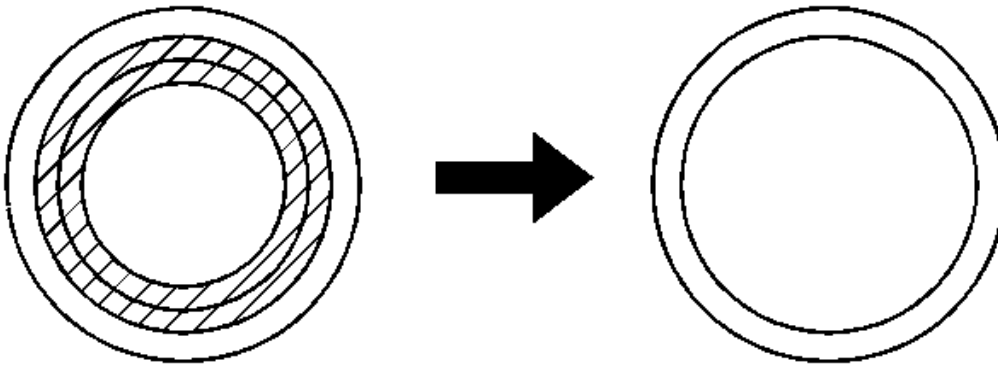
View Of Sealing Part Of Plug Tube Gasket
